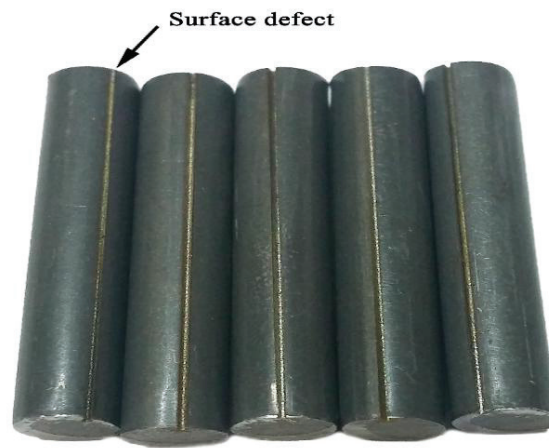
Picture of work-pieces having longitudinal surface defect.
